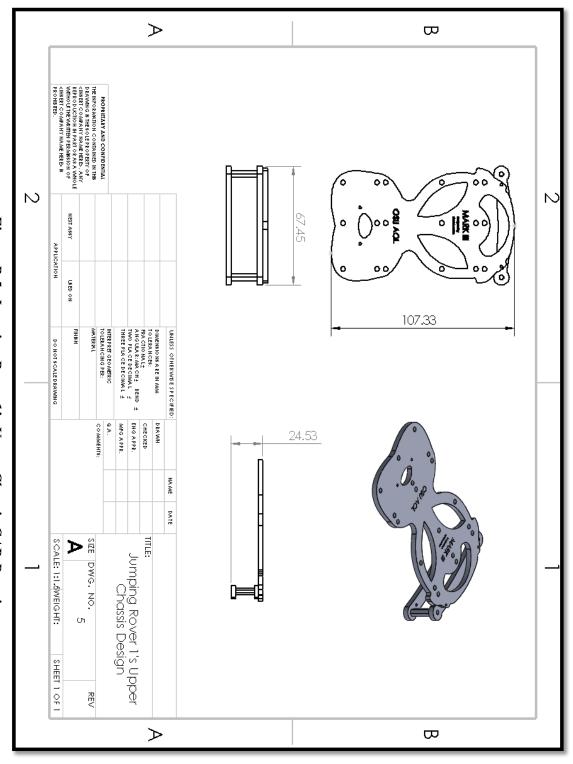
Jumping Rover 1's Upper Chassis CAD Drawing
